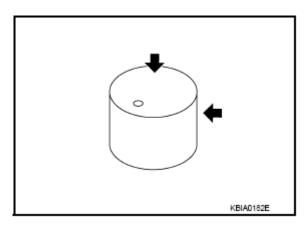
Locating Valve Lifter (EXH) Inspection Points Courtesy of NISSAN NORTH AMERICA, INC.
